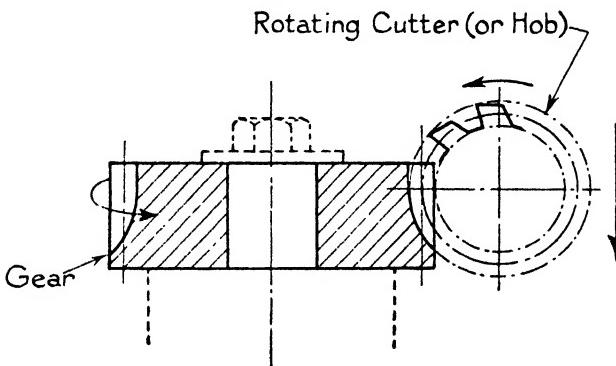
PRINCIPLE OF GEAR HOBBLING
